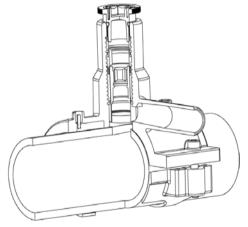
Electro-socket welding of a tapping tee (principle).
